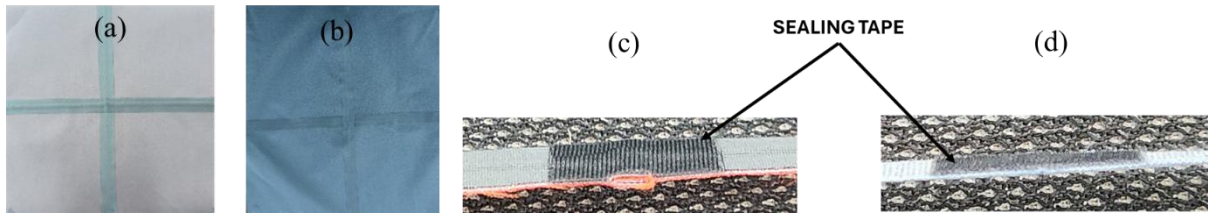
Appearance of (a) Stitch-sealing on fabric, (b) Weld-sealing on fabric, cross-sectional images of (c) Stitch-sealing (d) Weld-sealing
